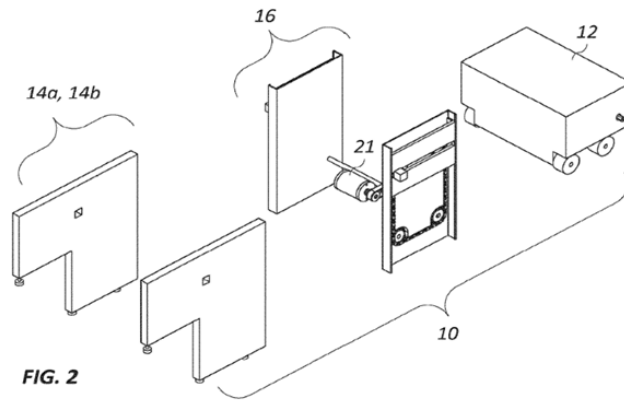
Patent drawing of the ROSA internal mechanism [12].
